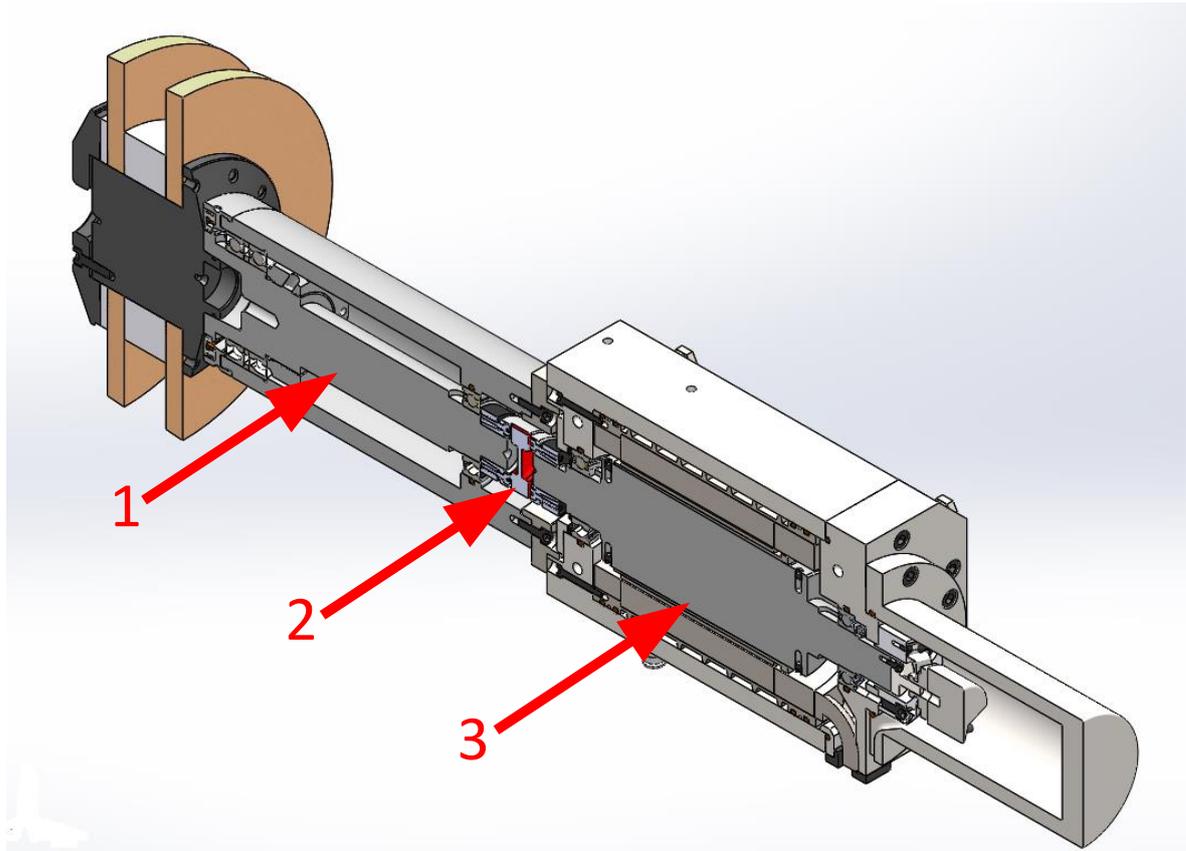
Coupling connection: 1 - grinding spindle; 2 – coupling; 3 - motor spindle
